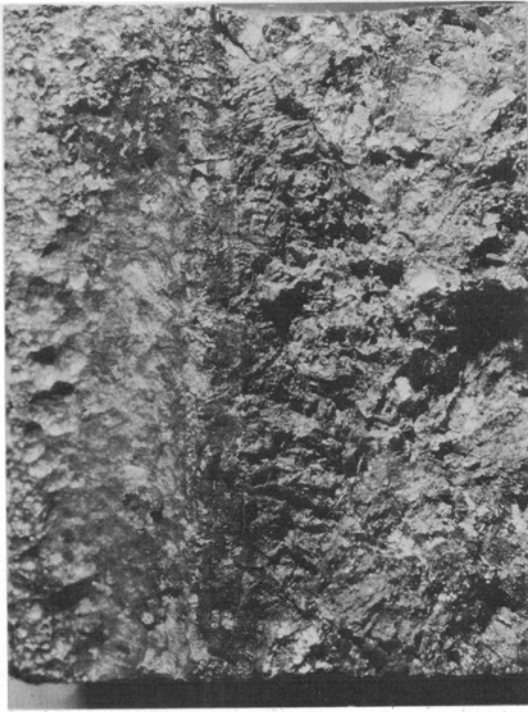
Fracture surfaces of unembrittled specimens tested as in Fig. 6 showing: (a) initiation, (b) slow hydrogen cracking, and (c) fast cracking regions.
